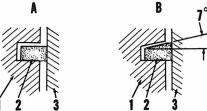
Comparison of standard and Keystone type piston and ring assemblies.
